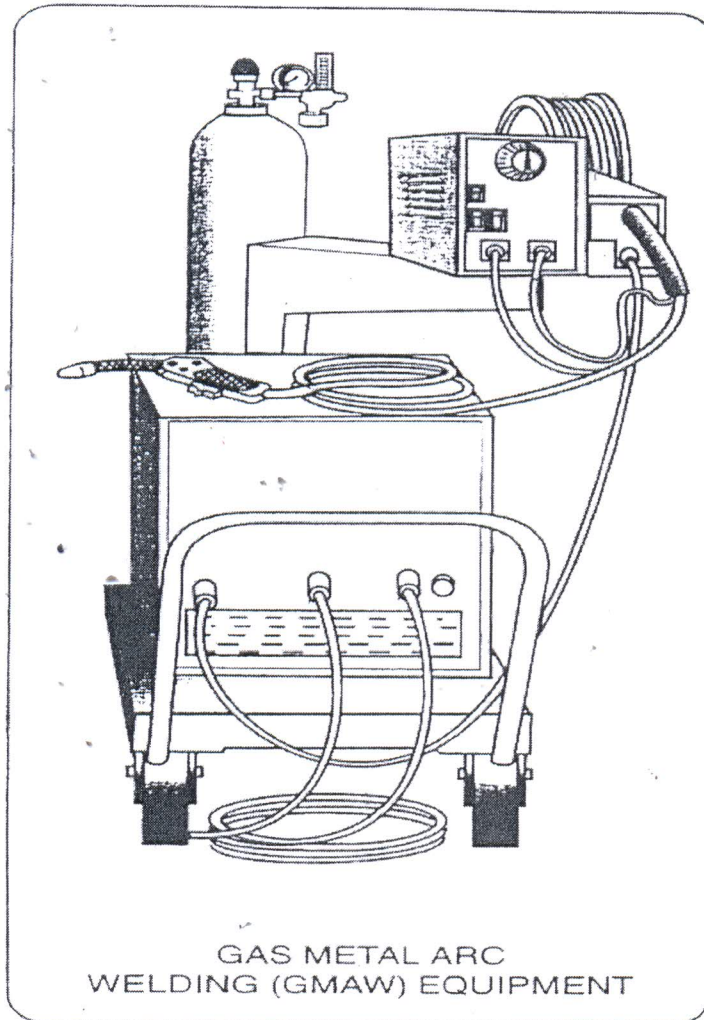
Gas Metal Arc Welding (GMAW) Equipment
